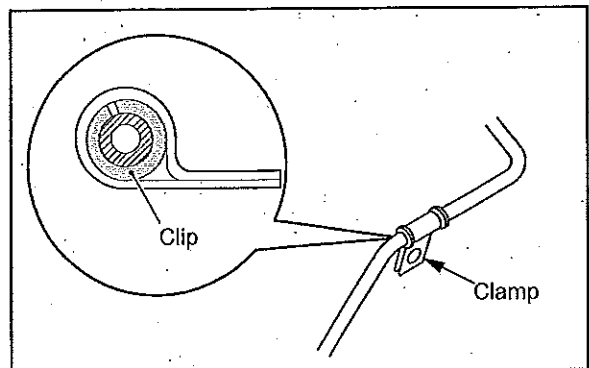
Oil pipe and Clip - Inspect and Replace
